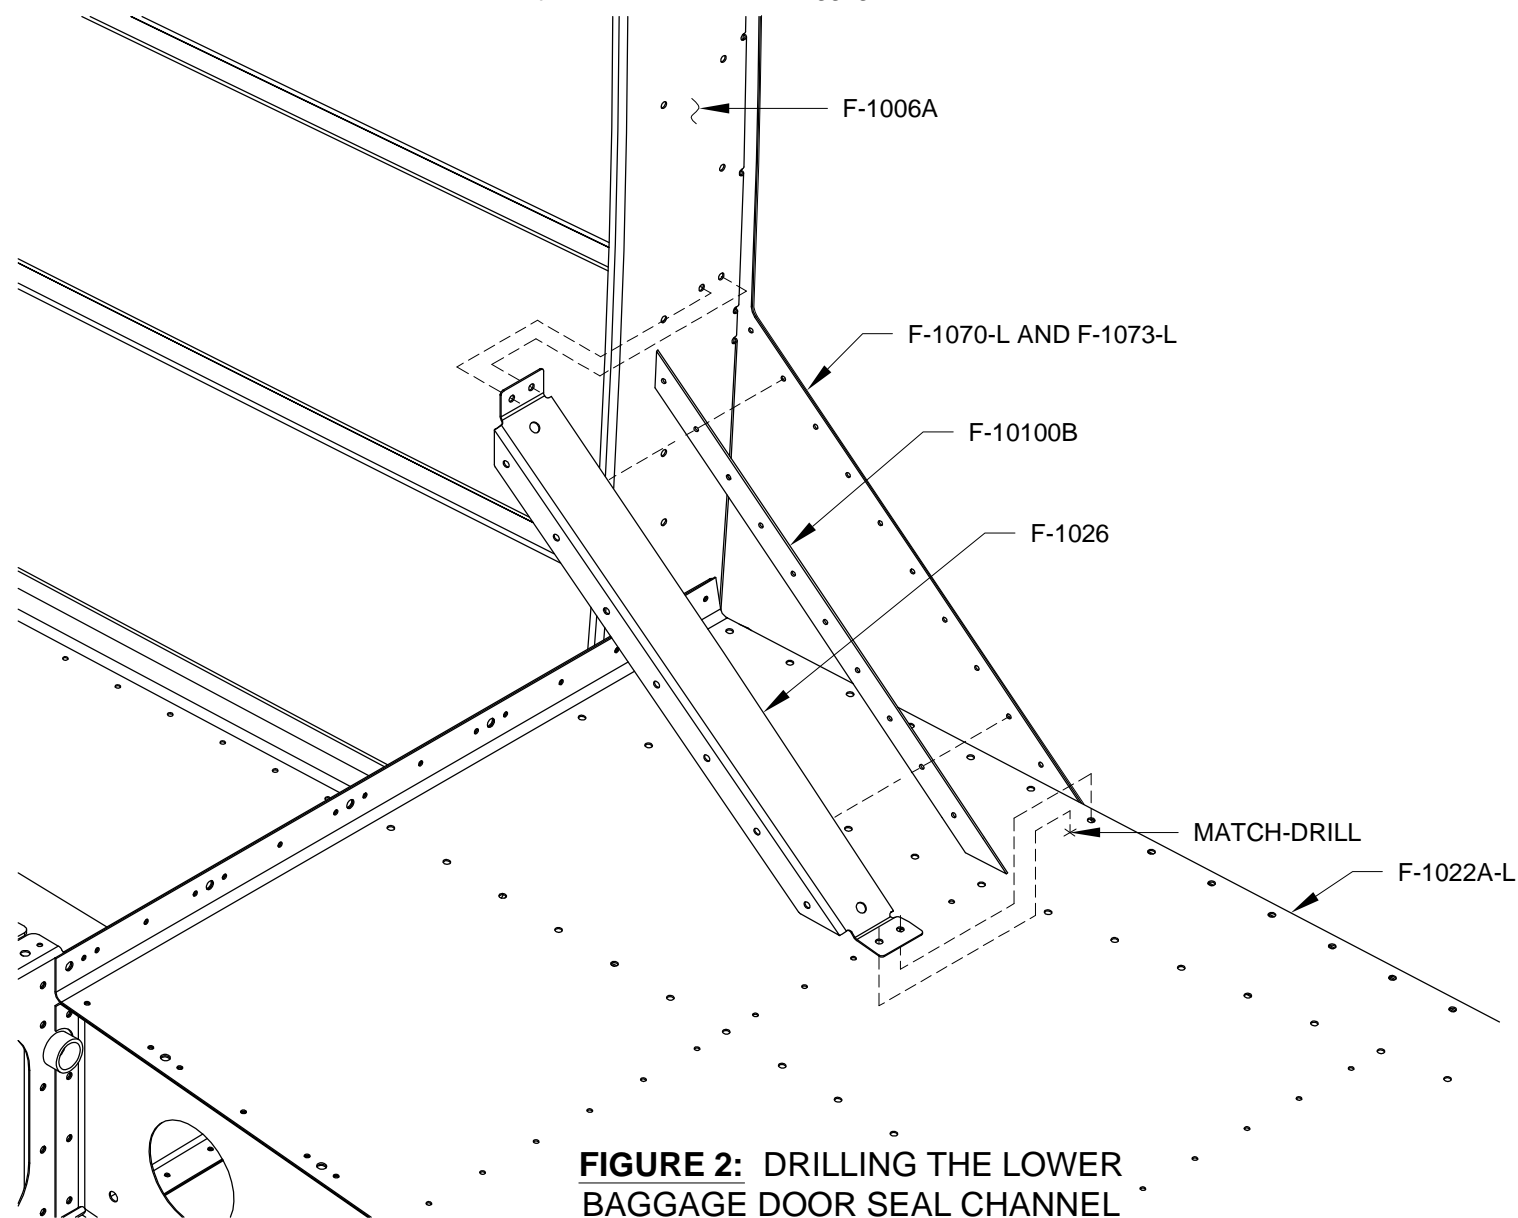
DRILLING THE LOWER BAGGAGE DOOR SEAL CHANNEL
